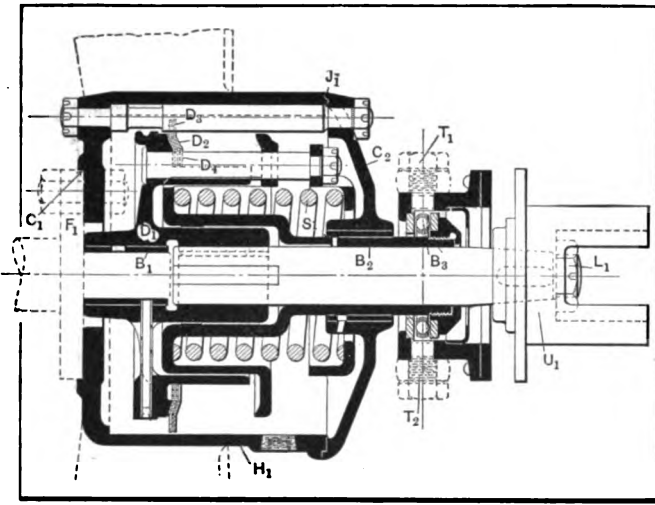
Multiple-disc clutch within the flywheel confines, with a stout spring and ball-thrust, and an oil-tight housing
